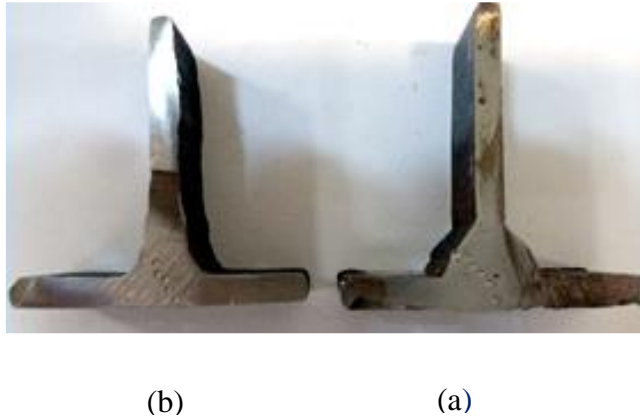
Hardness profile; a) welded specimen, b) rolled specimen.
